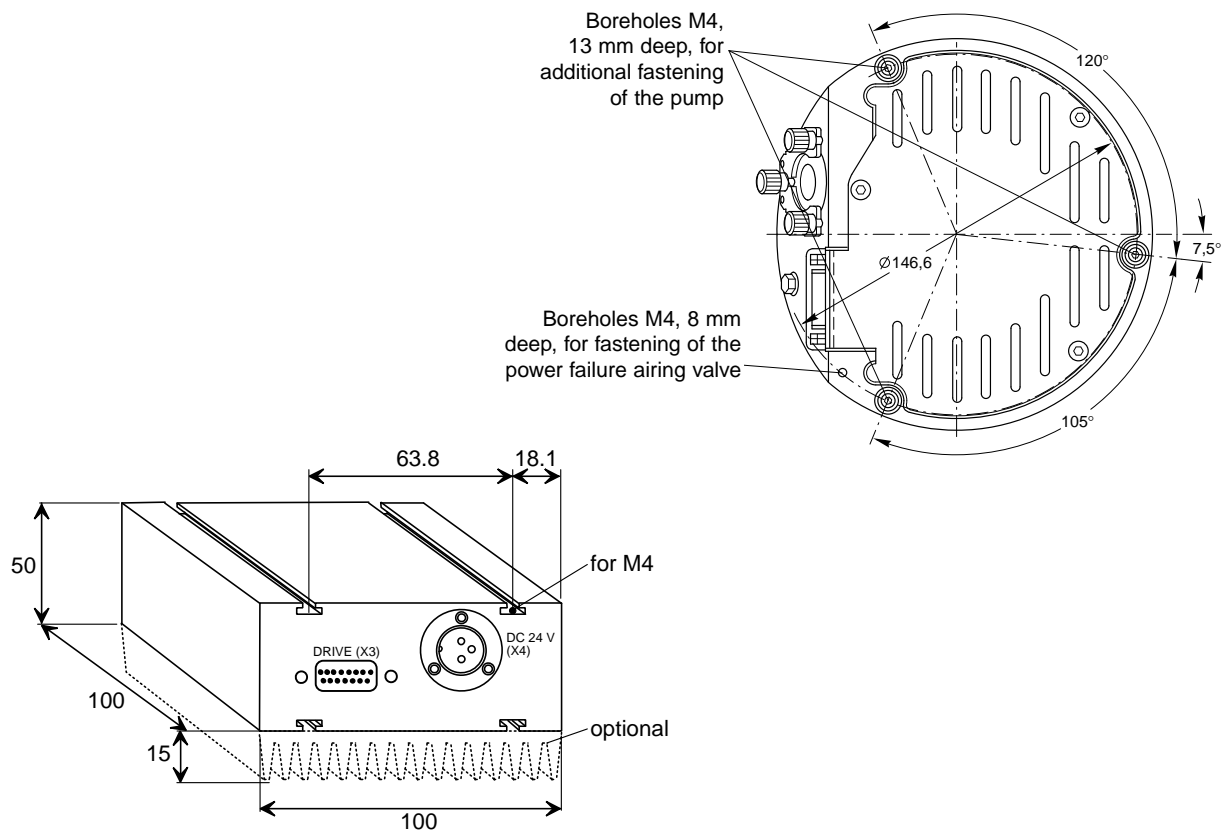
Dimensional drawing for the frequency converter and bottom of the pump, dimensions in mm
